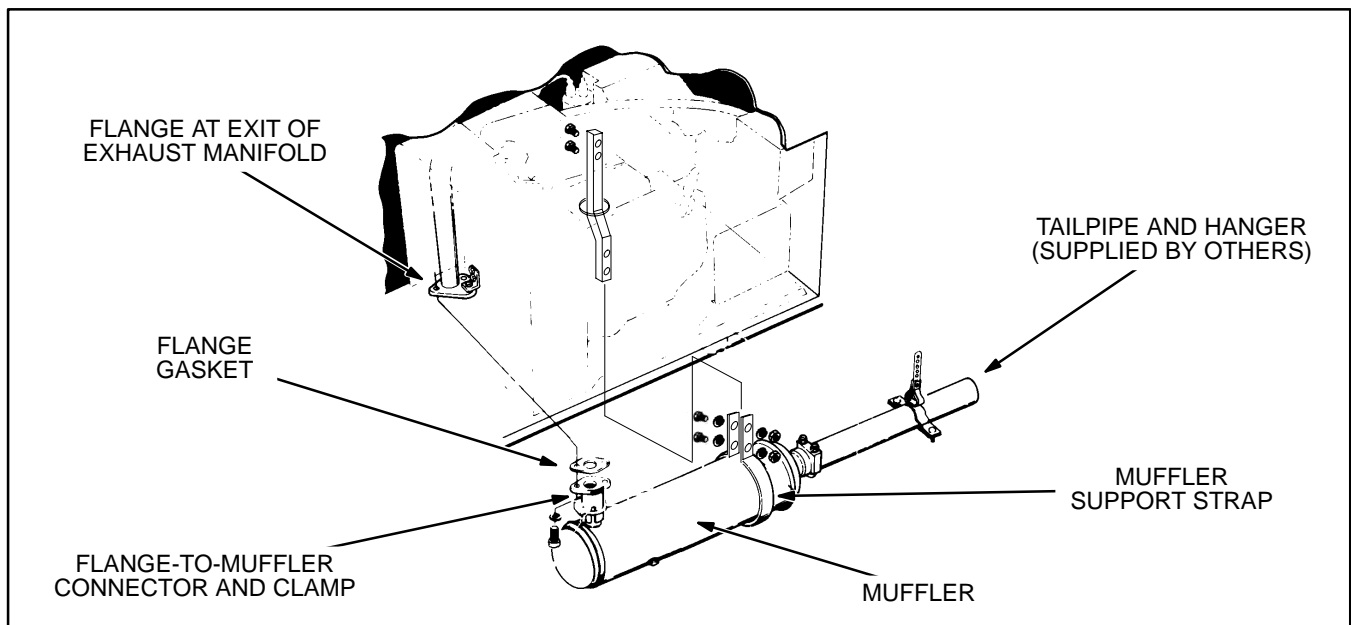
TYPICAL MUFFLER INSTALLATION
